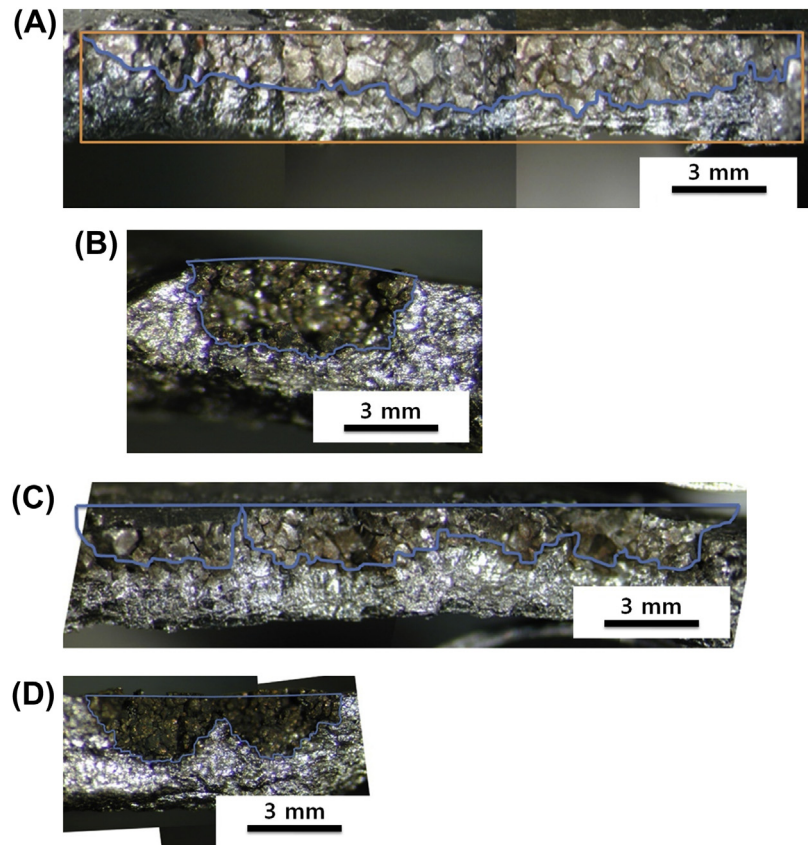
Optical micrographs of mock-up cracks generated in the alloy 600 base metal of a PZR heater sleeve. The lines in blue indicate the cracked area produced in this study. (A) OD axial crack. (B) OD circumferential crack. (C) ID axial crack. (D) ID circumferential crack. ID, inner diameter; OD; outer diameter.
